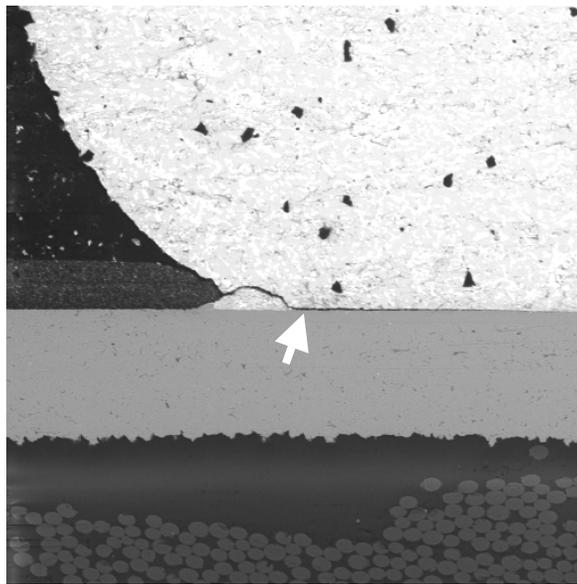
Microsection of partially fracture BGA solder joint [362X, BSE SEM image, ref. SLI-465].
